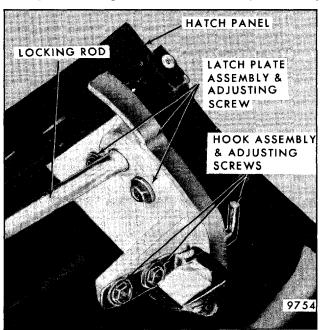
Hatch Roof - Latch and Hook Assembly Adjustments
